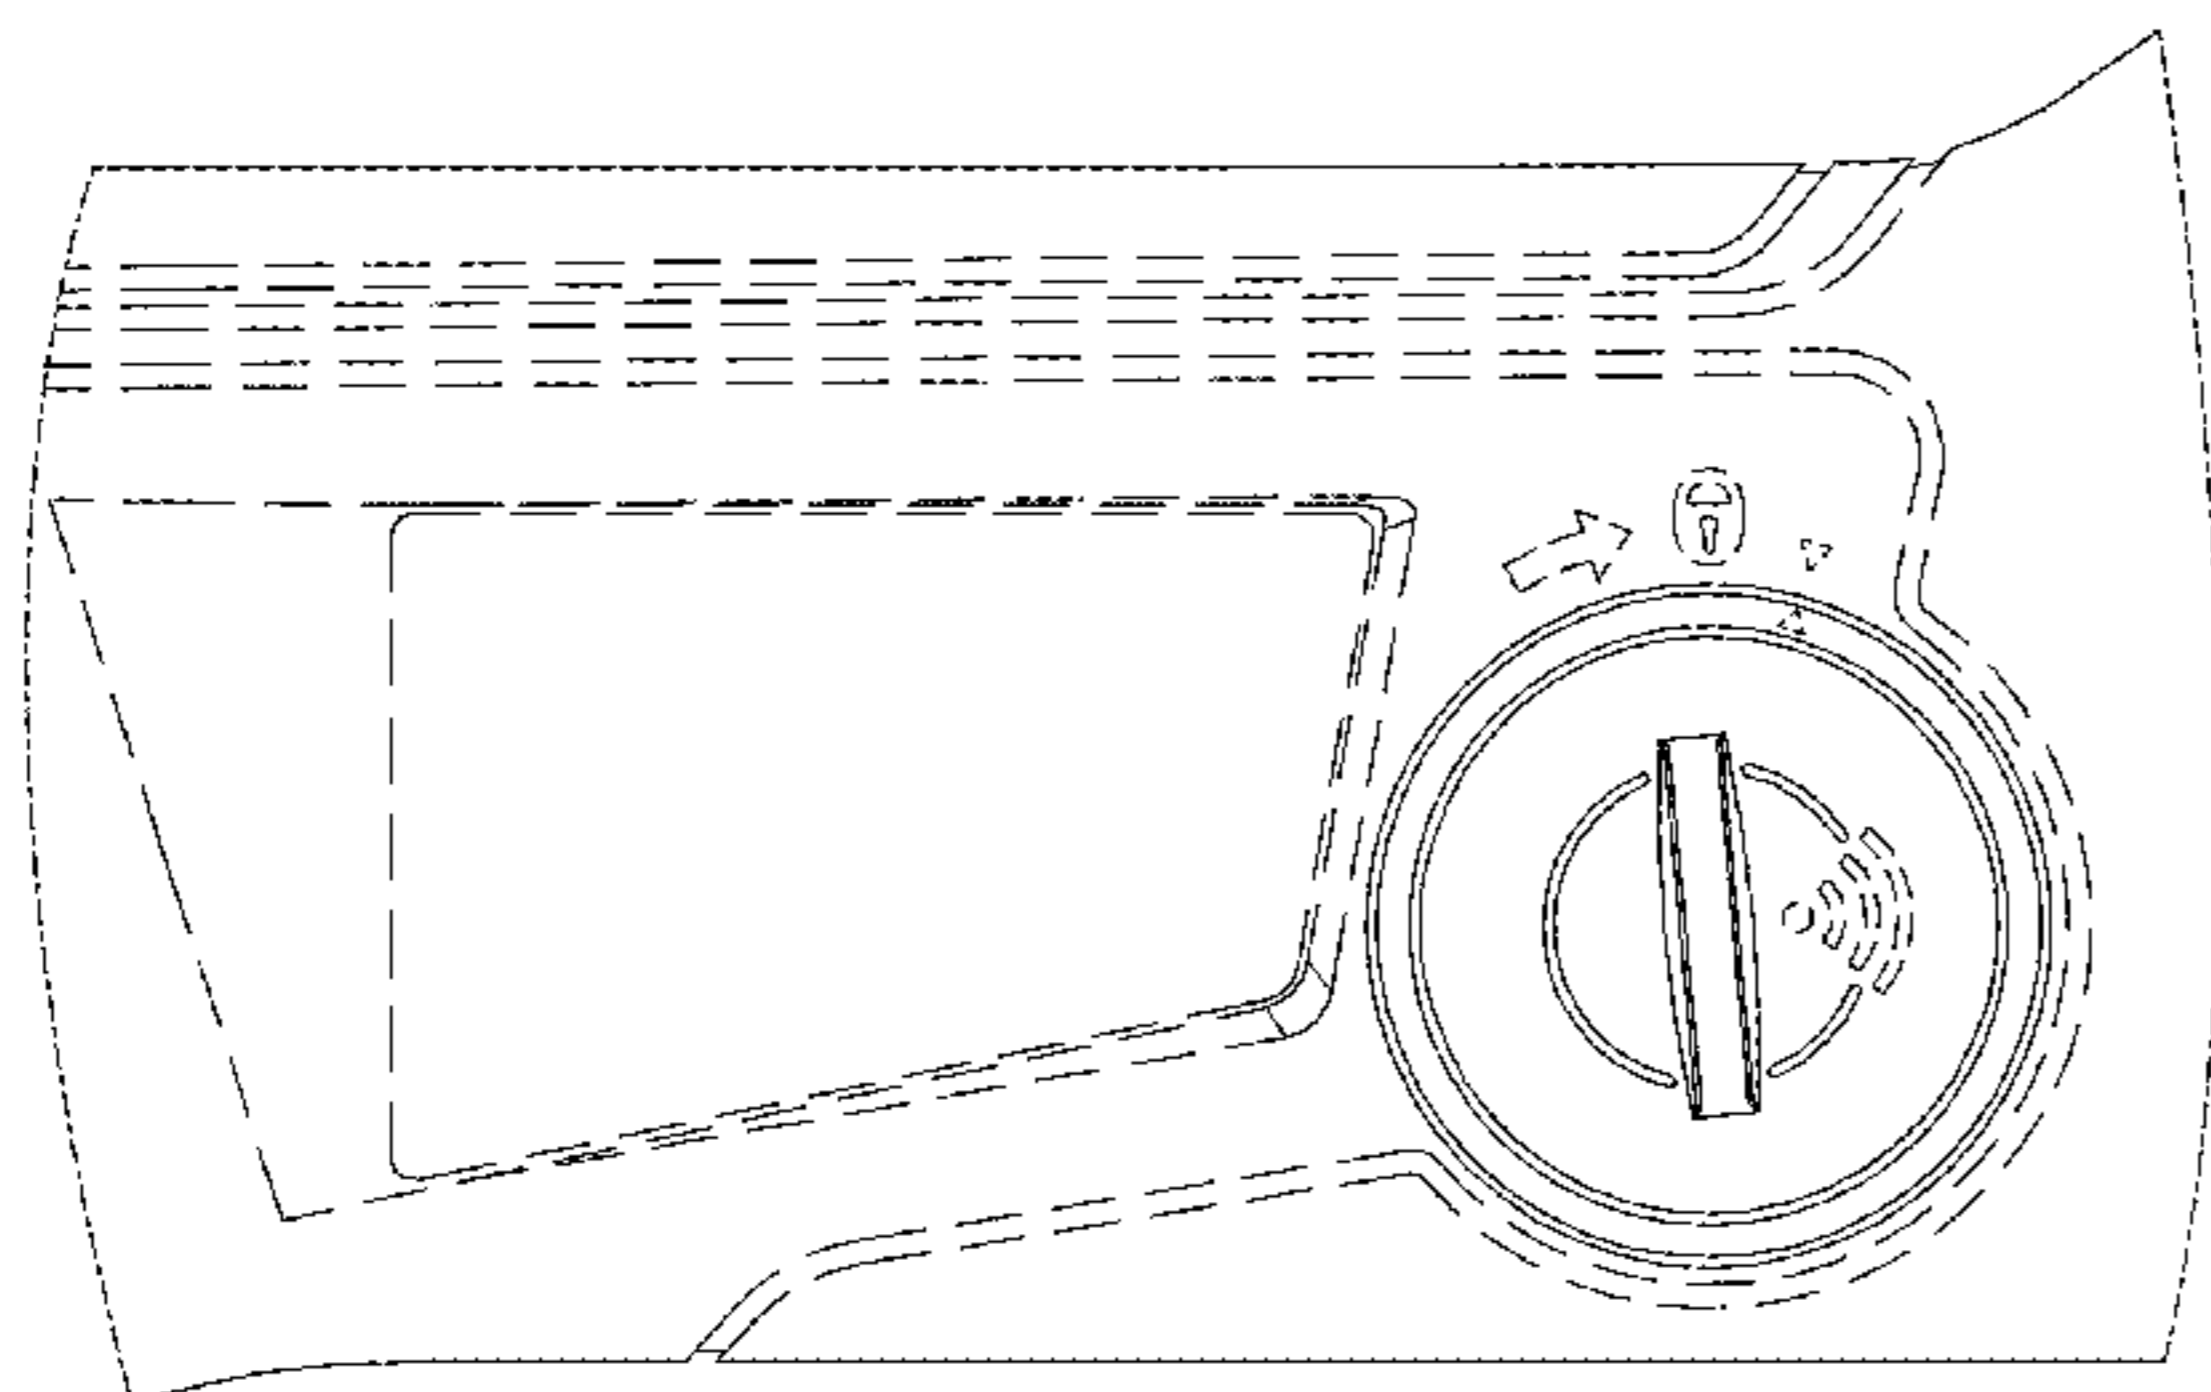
is a right side elevational view of the power tool of FIG. 11;
